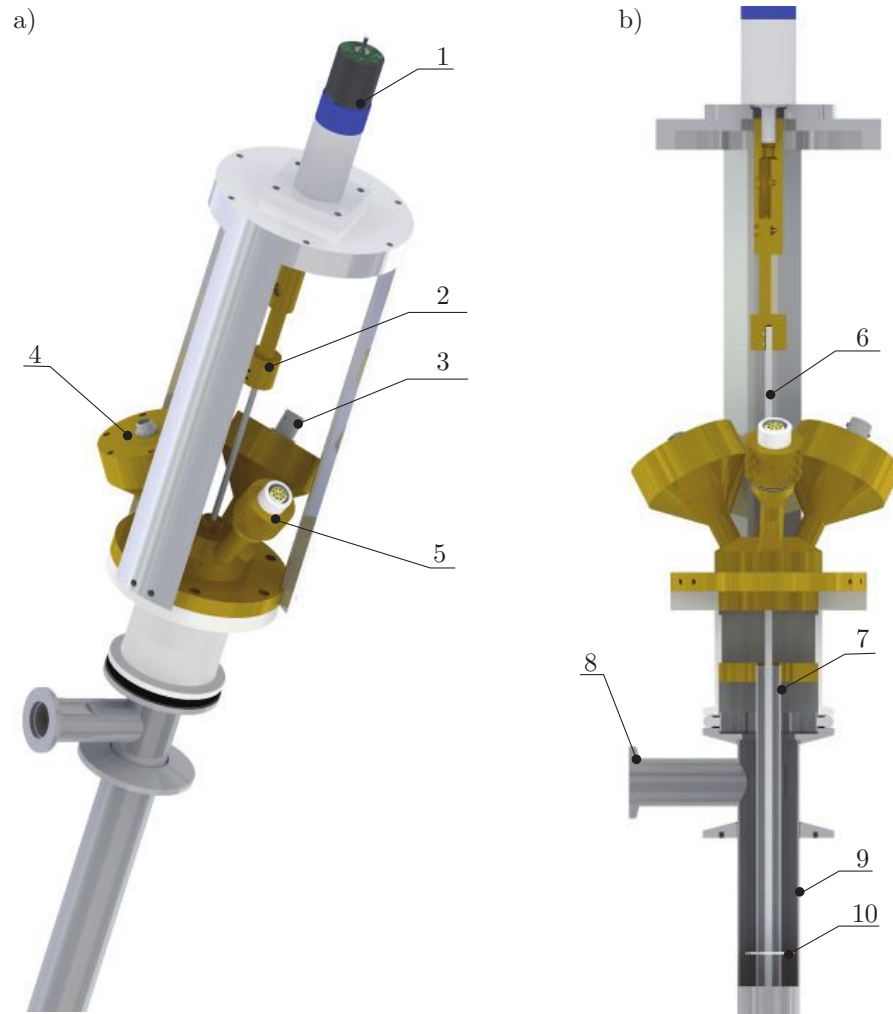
Detail of the top part of the probe. a) 1 - stepper motor, 2 - up/down slider, 3 - BNC feedthrough, 4 - optical fiber feedthrough, 5 - temperature sensor feedthrough; b) 6 - sample holder rod, 7 - sample holder rod and optical fiber housing, 8 - internal gas chamber port, 9 - internal static exchange gas chamber, 10 - temperature shields/cable guides.
